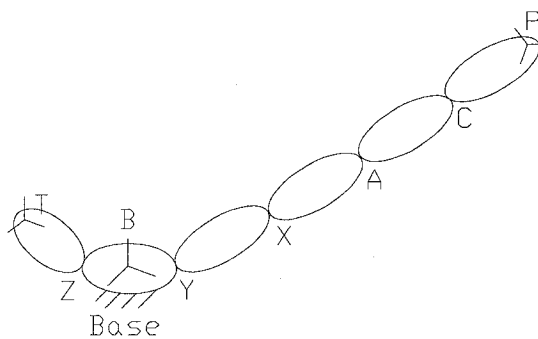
The kinematic chain of the Matsuura five-axis milling center
